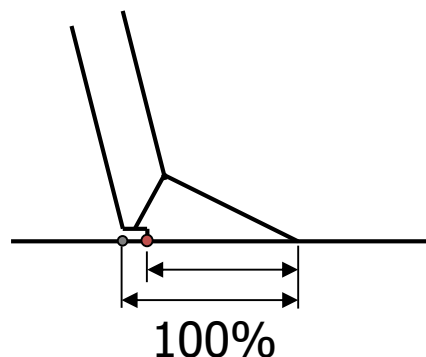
Reduced level of weld protrusion at the root
